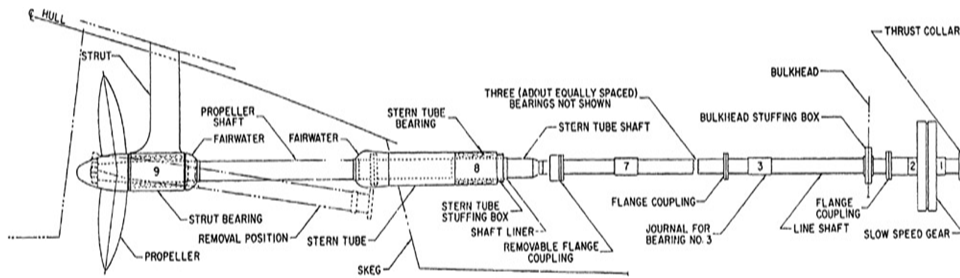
Typical Ship Shaftline Bearings and Components [11]
